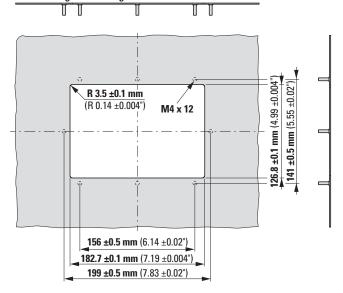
Dimensional drawing for mounting XV-313-70-..
